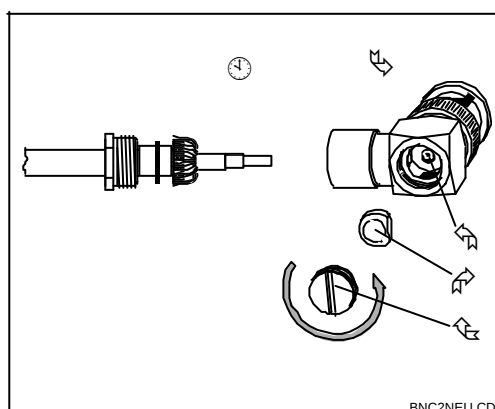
Installation of terminated pH connecting line in BNC elbow plug
